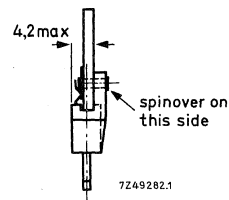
Fixing of the interconnector to the printed-wiring board.
